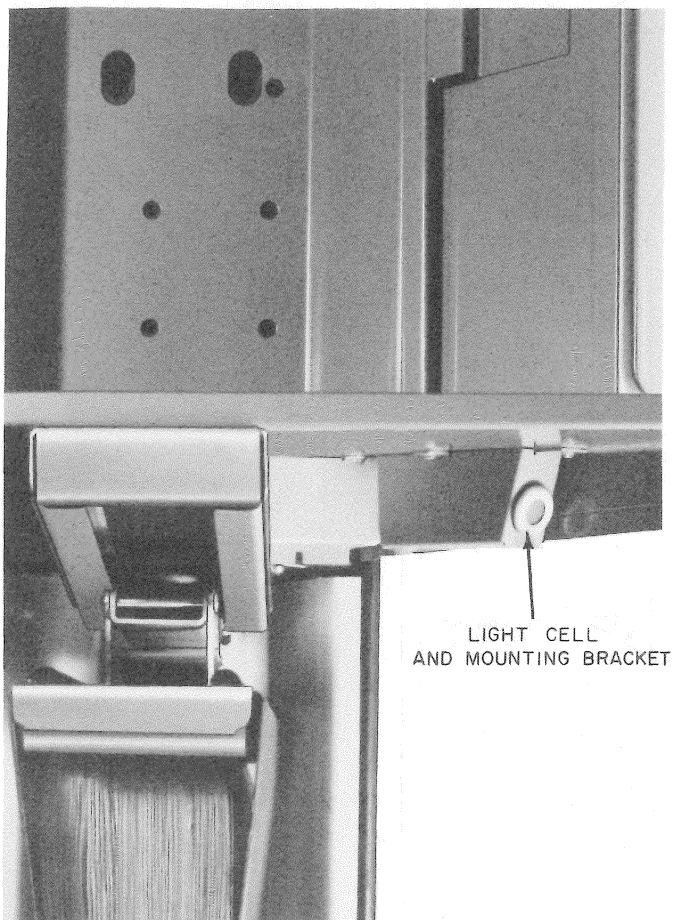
Installation of Light Cell Mounting Bracket on KS-19426 Mounting
